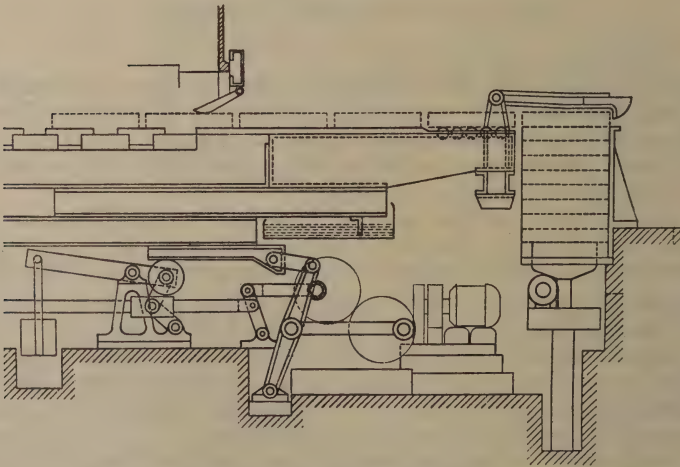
Walking Beam Furnace. Elevation of conveying gear.
